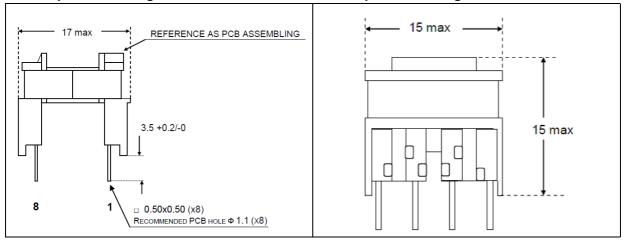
Dimensional drawing and pin placement diagram - side view 1
